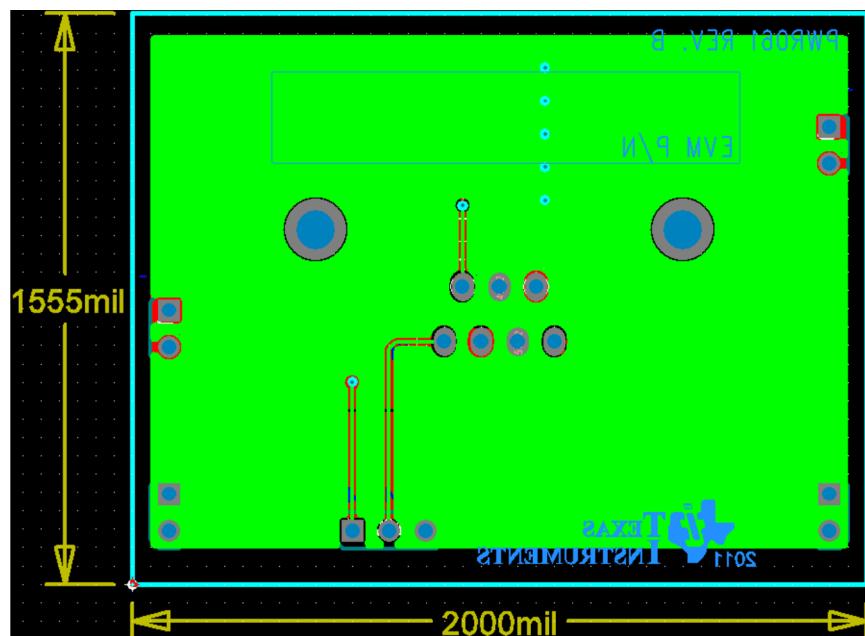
TPS7A33 TO-220 EVM PCB Layout Example: Bottom Layer
